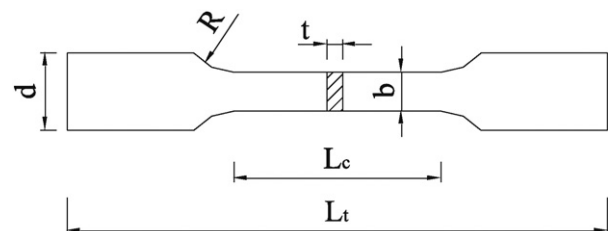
Shapes of the hot-rolled Q235, Q345, and Q420 steel specimens.
